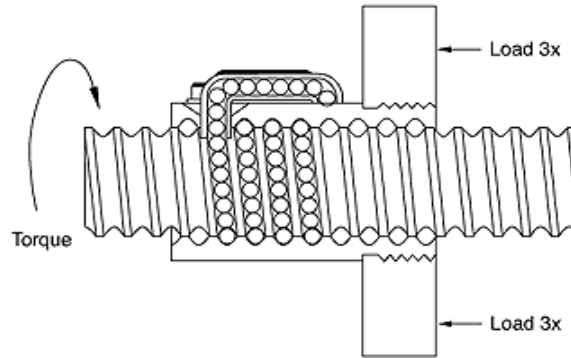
Ball screw mechanism in the linear actuator with lead screw
